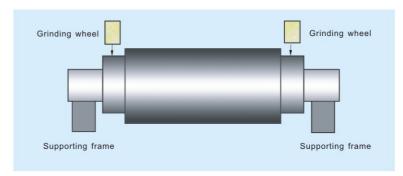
Fig. B: The step is now a reference surface, grinding the roll neck will allow you to mount the bearings, ensure that the roughness, radial run-out and concentricity are all in compliance with the tolerance requirements after grinding.
